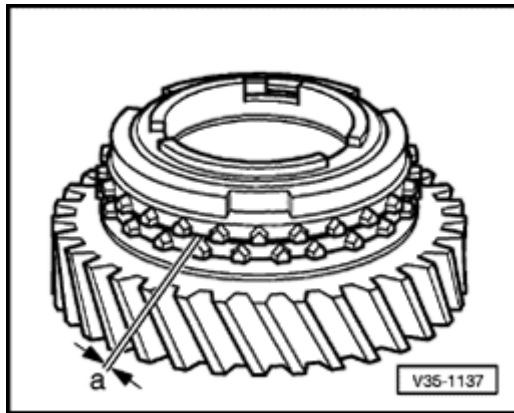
Checking 1st, 2nd and 3rd gear synchro-rings for wear
